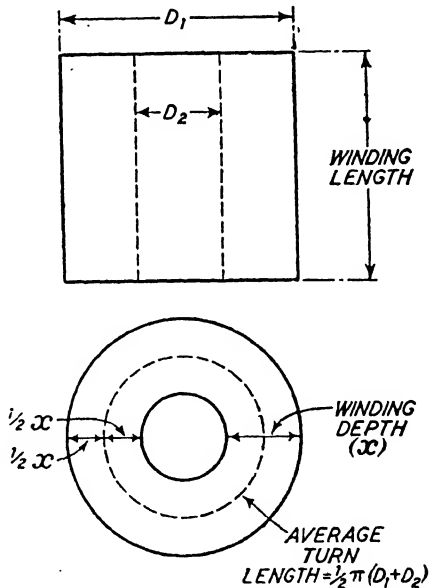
PRINCIPAL DIMENSIONS OF CYLINDRICAL COIL.
